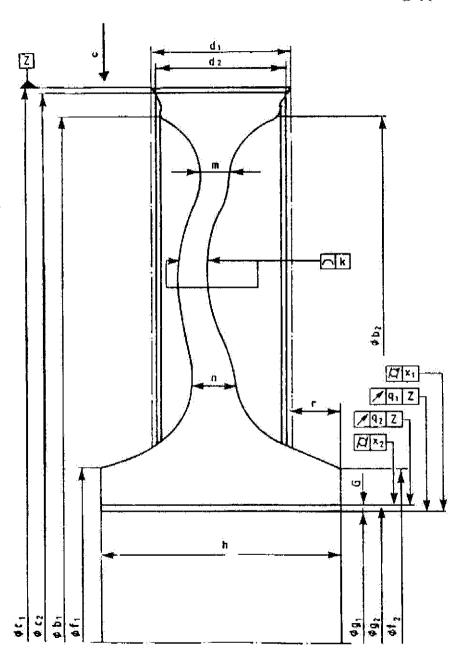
Symbol for dimensions and geometrical tolerances
